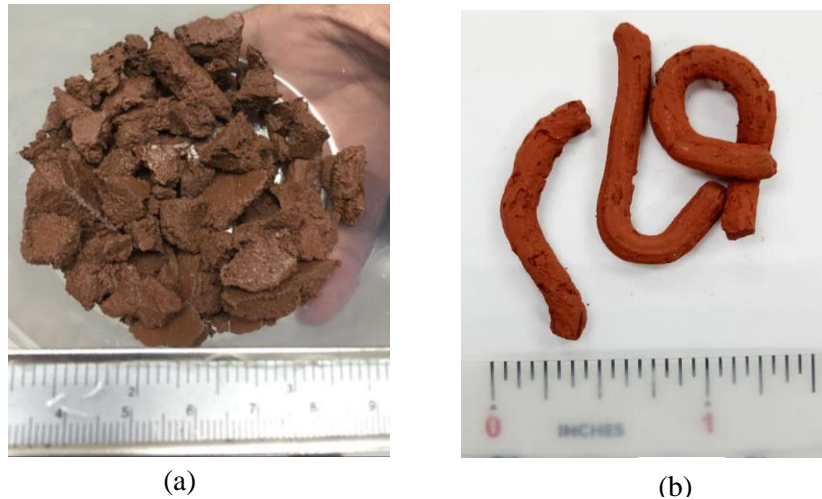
; Example of feedstock, (a) raw feedstock without shaping process (after mixing process) (b) feedstock after extrusion process before it is cut into small pellets (after injection moulding process)
